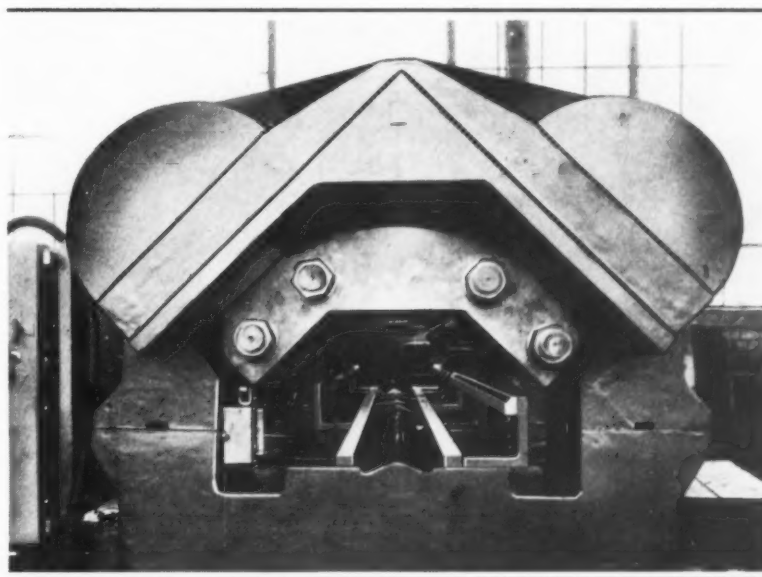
Discharge End of the Cylinder-block Broaching Machine
